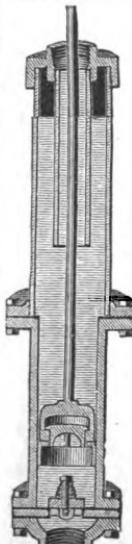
represents, in section, a new design of Deep Well Pump Cylinder, surmounted by a 4-foot wrought-iron pipe air chamber, which can be changed to any desired length. The body of Cylinder is of cast brass, with bolted flange attachment; the plunger is of same metal, while the lower valve is a special type of spring poppet valve, much superior to the ordinary leather valve. We believe this Cylinder possesses the best features of a large single-acting Cylinder, and shall be pleased to furnish estimates on other sizes than given in our table below.
